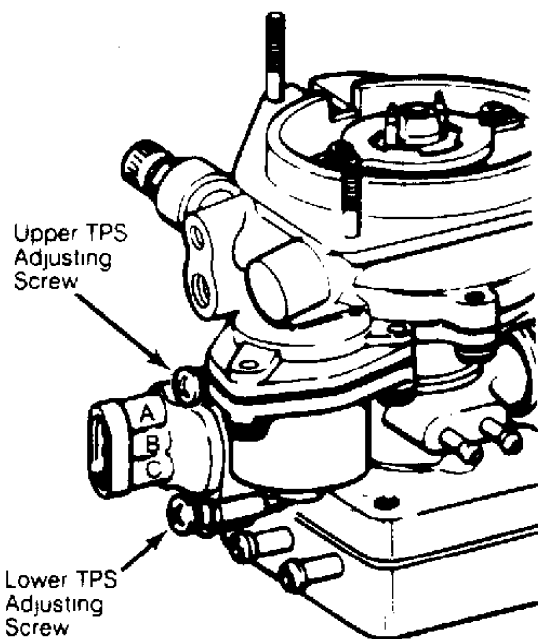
Adjusting Throttle Position Sensor (Man Trans)
